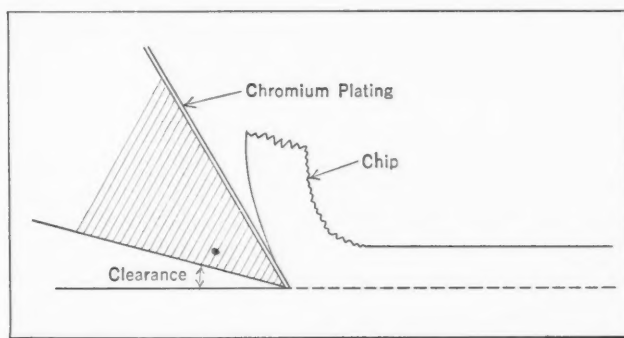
Diagram Indicating Cutting Action of Tool with Front Face Chromium Plated
